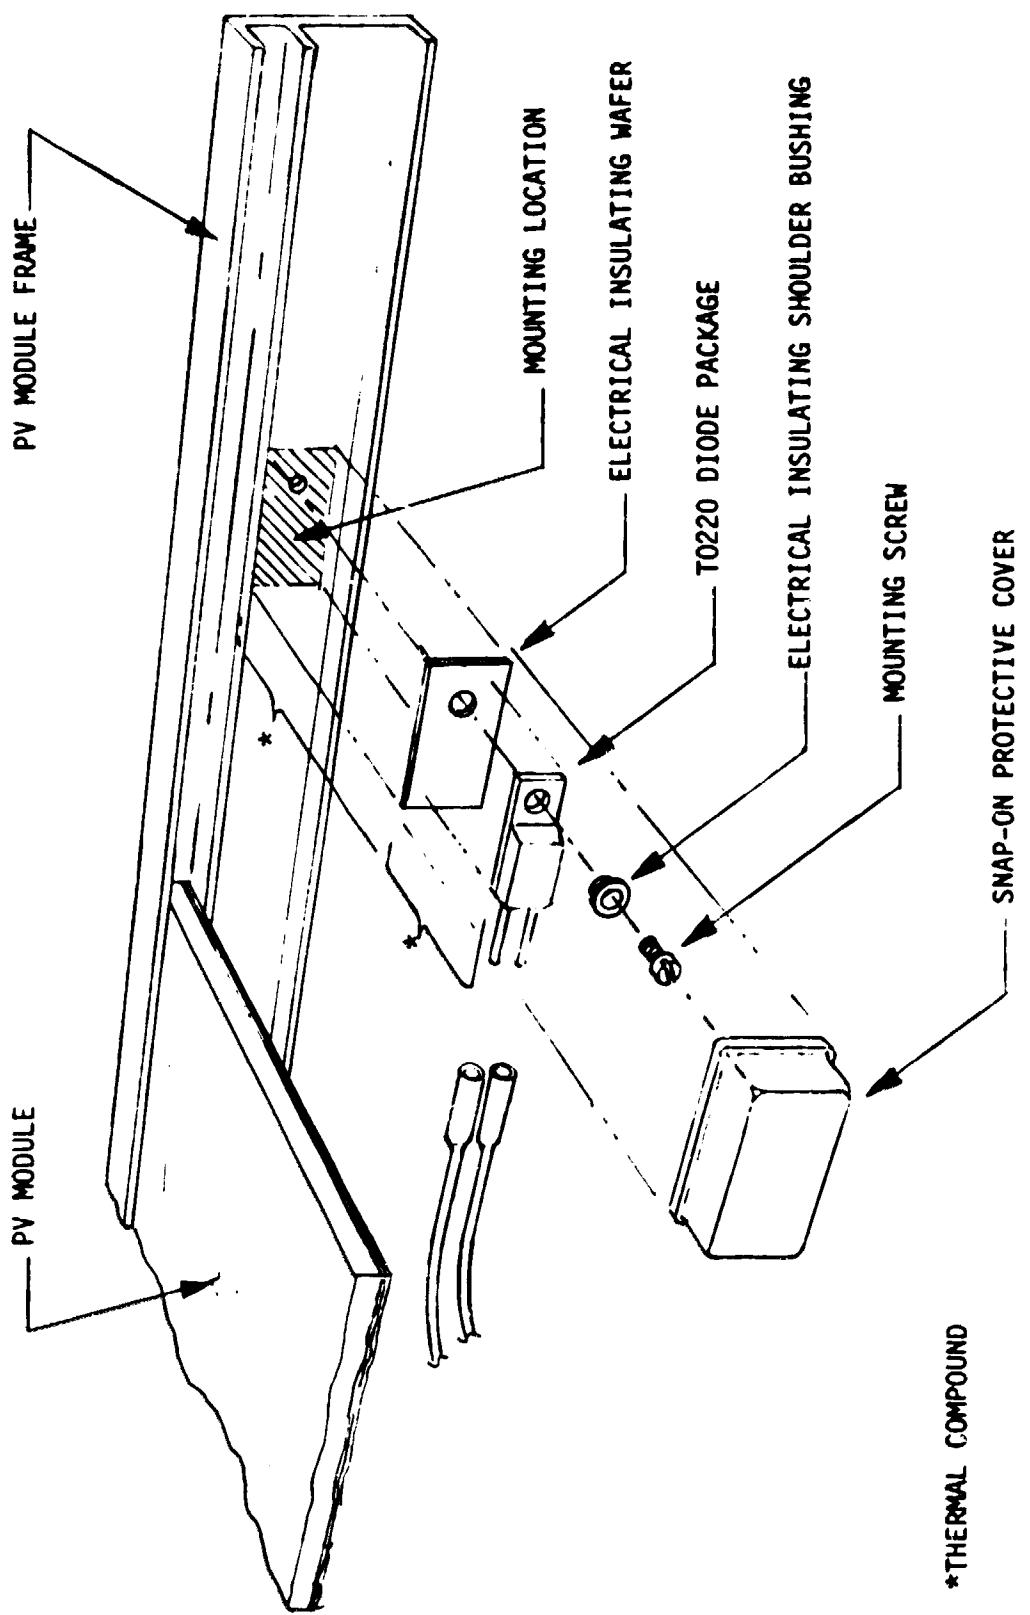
T0220 Diode Package Mounted to PV Module Frame
